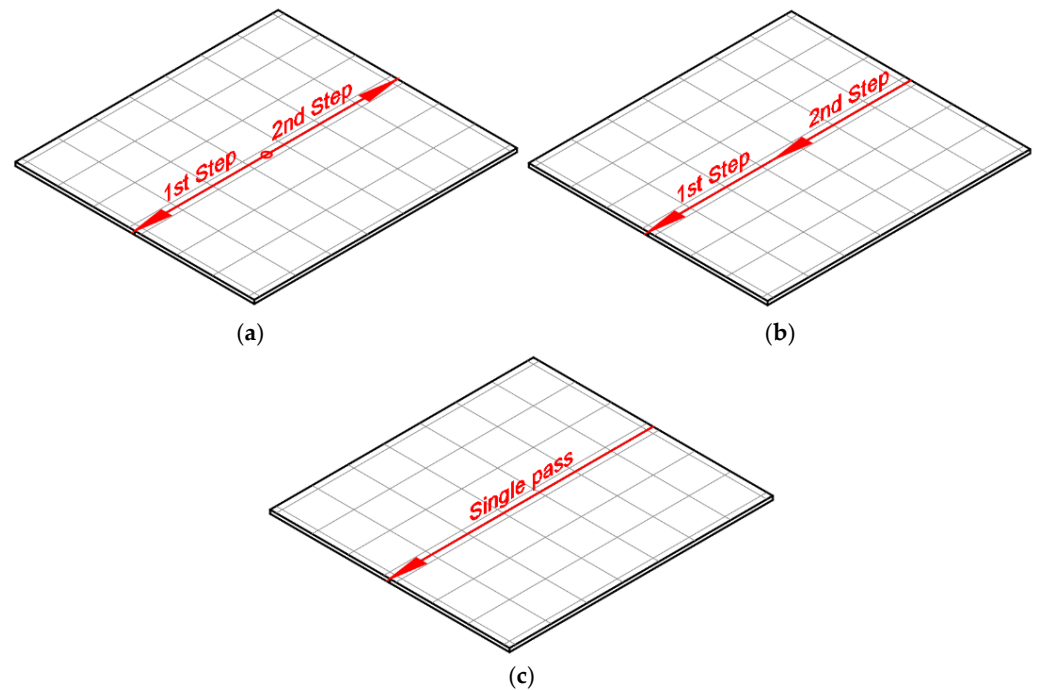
Butt-joint welding sequences, (a) symmetrical method (SM), (b) backward method (BM), and (c) single-pass method (SP).
